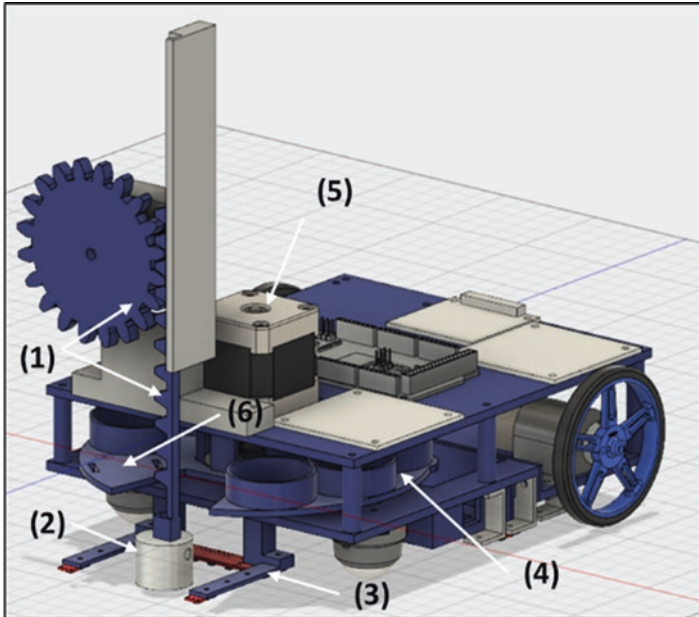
A 3D model of the robot: gear and pinion system for retrieval and deposit of tokens (1), electromagnet (2), reflectance sensor array for navigation (3), token storage carousel (4), stepper motor to rotate the carousel (5), location of the color sensor (6)
